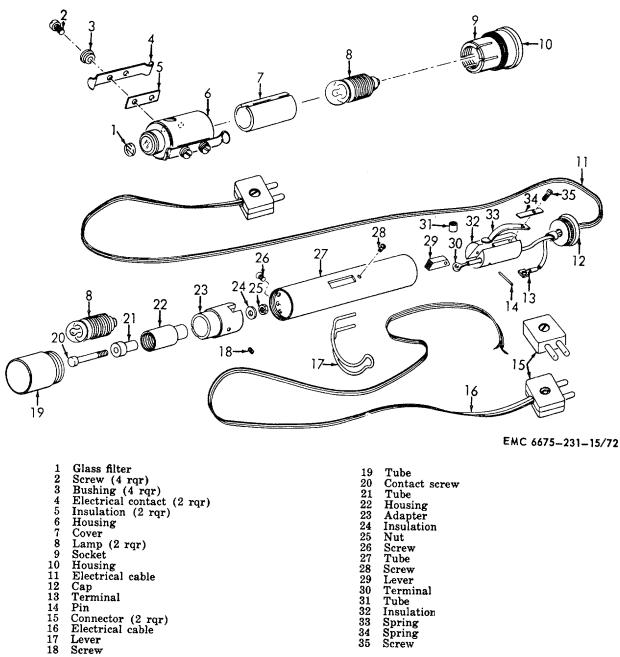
Light housings, connector cable, and hand light, disassembly and reassembly.
